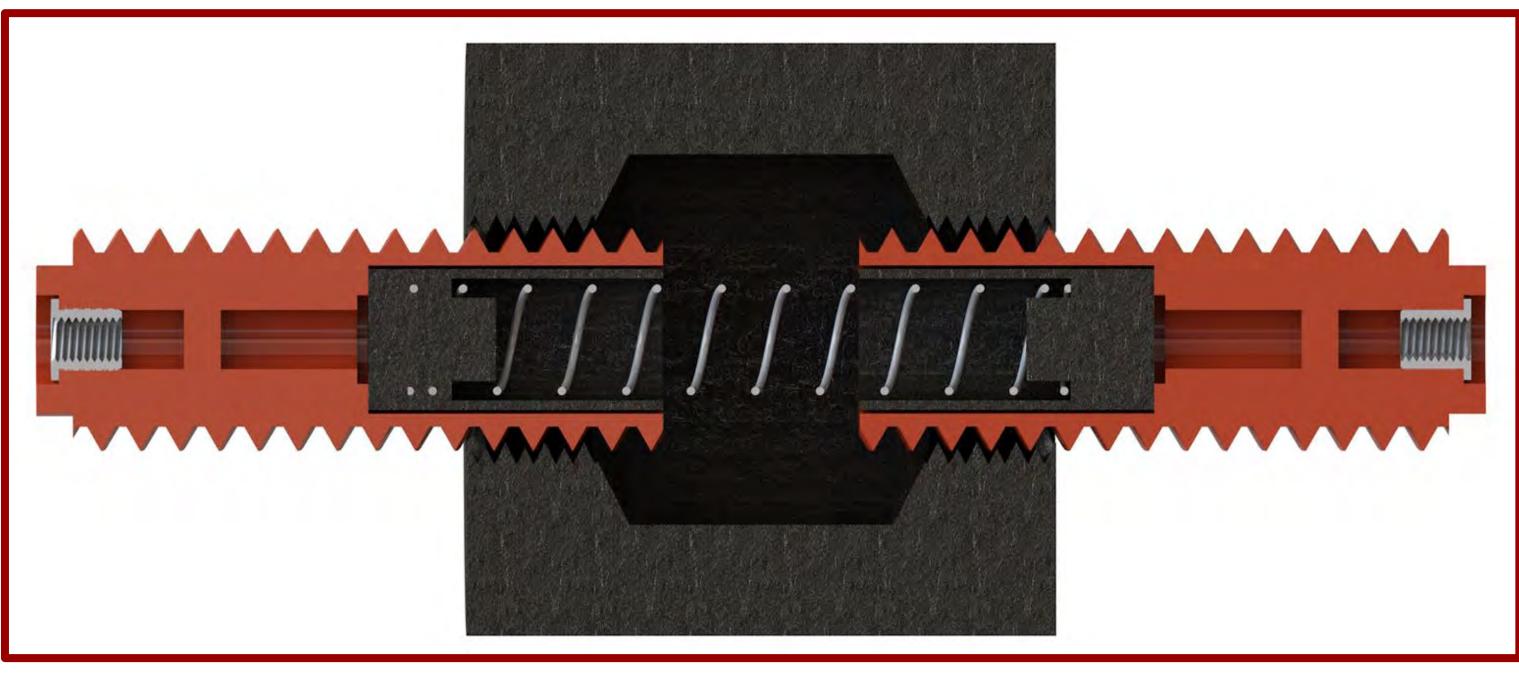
Rendering of the double-thread mechanical inerter. Studs (indicated in red) have left and right handed thread, respectively. The flywheel (black) is internally double threaded.
